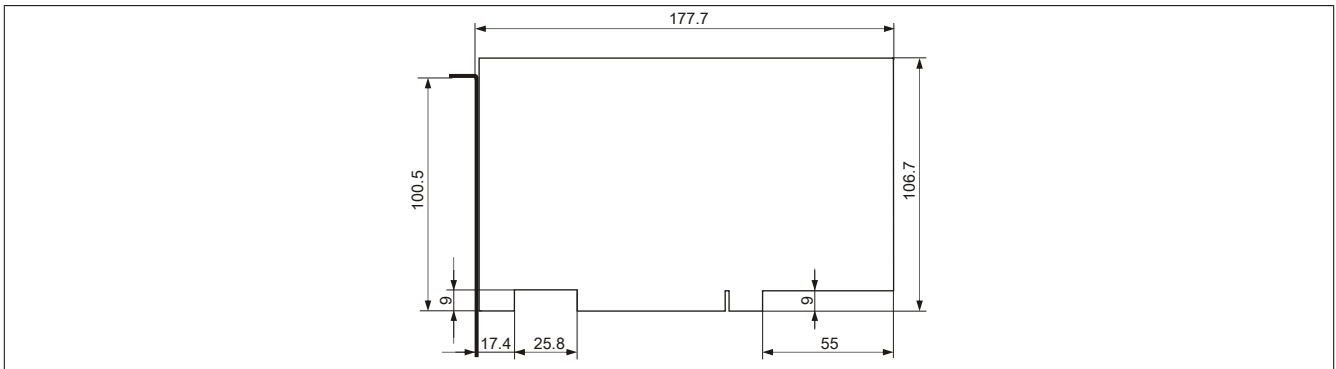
Standard half-size 32-bit PCI card - Dimensions
